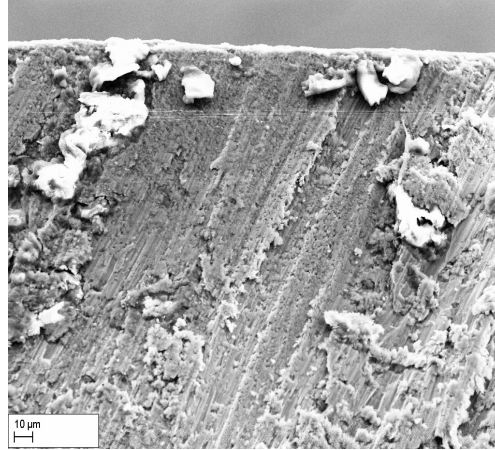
Microscopic view of the PS plate edge after guillotine cutting
